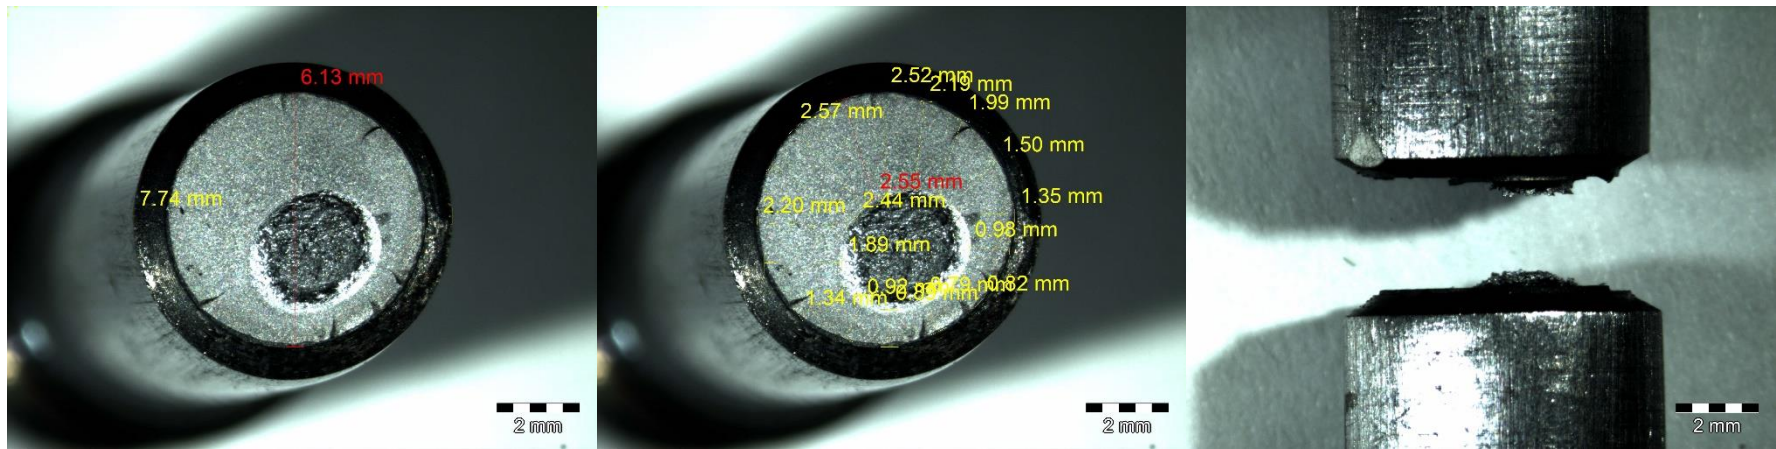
Cross-sectional and side view of fractured StxWSD-02
